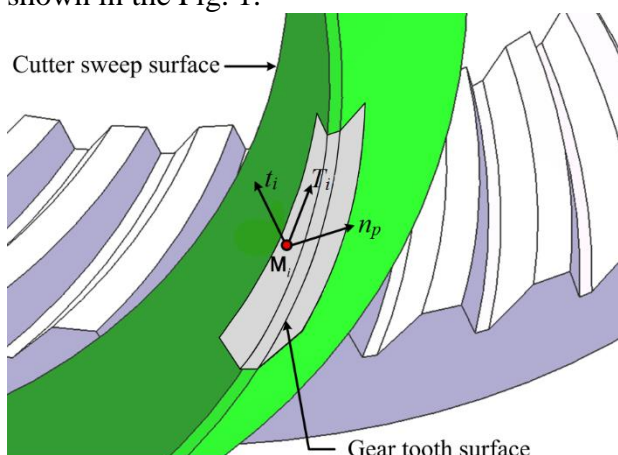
Gear tooth engagement with the cutter sweep envelope during the FORMAT machining. Cutter head of the face milling process contains several groups of inside and outside blades. These blades are arranged to machine the convex and the concave sides of the gear tooth, with the prescribed land width as shown in the Fig. 2.
